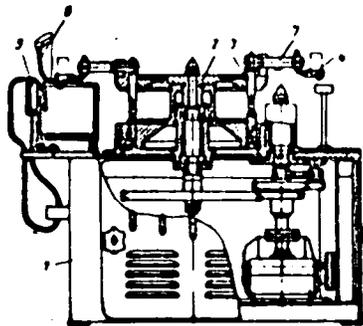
Machine for manufacturing electrodes for chemical power sources
